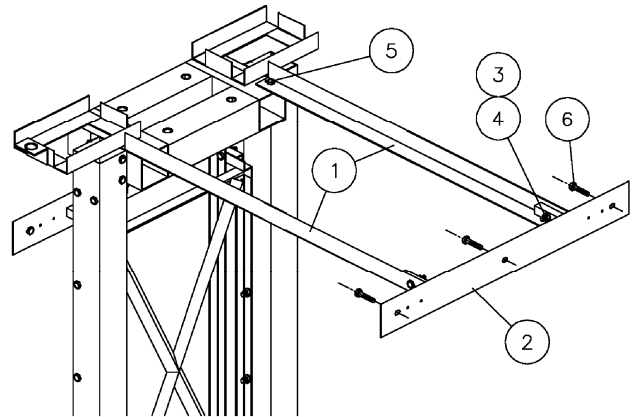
Installing the upper horizontal supports looking from in front of the guide rails.
